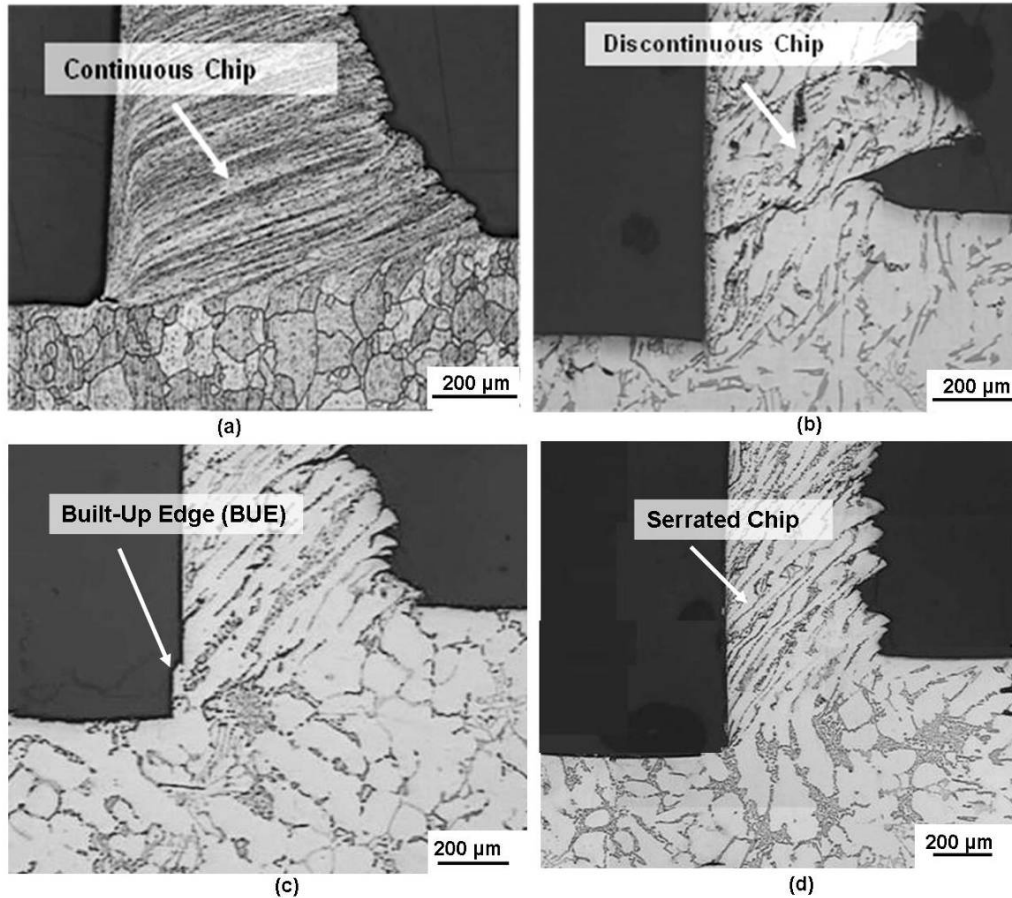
Various types of chips produced during orthogonal machining: (a) Continuous Chip, (b) Discontinuous or sawtooth chip, (c) Chip with BUE, (d) Serrated Chip.
